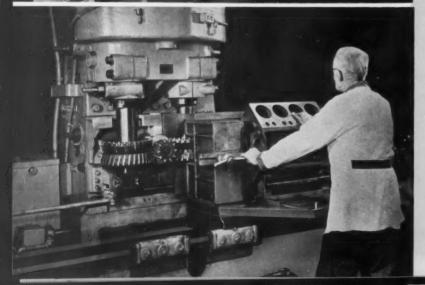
Bearing cap seats and bearing cap channel in cylinder block are milled in this setup. Channel width is held within 0.001 inch.
